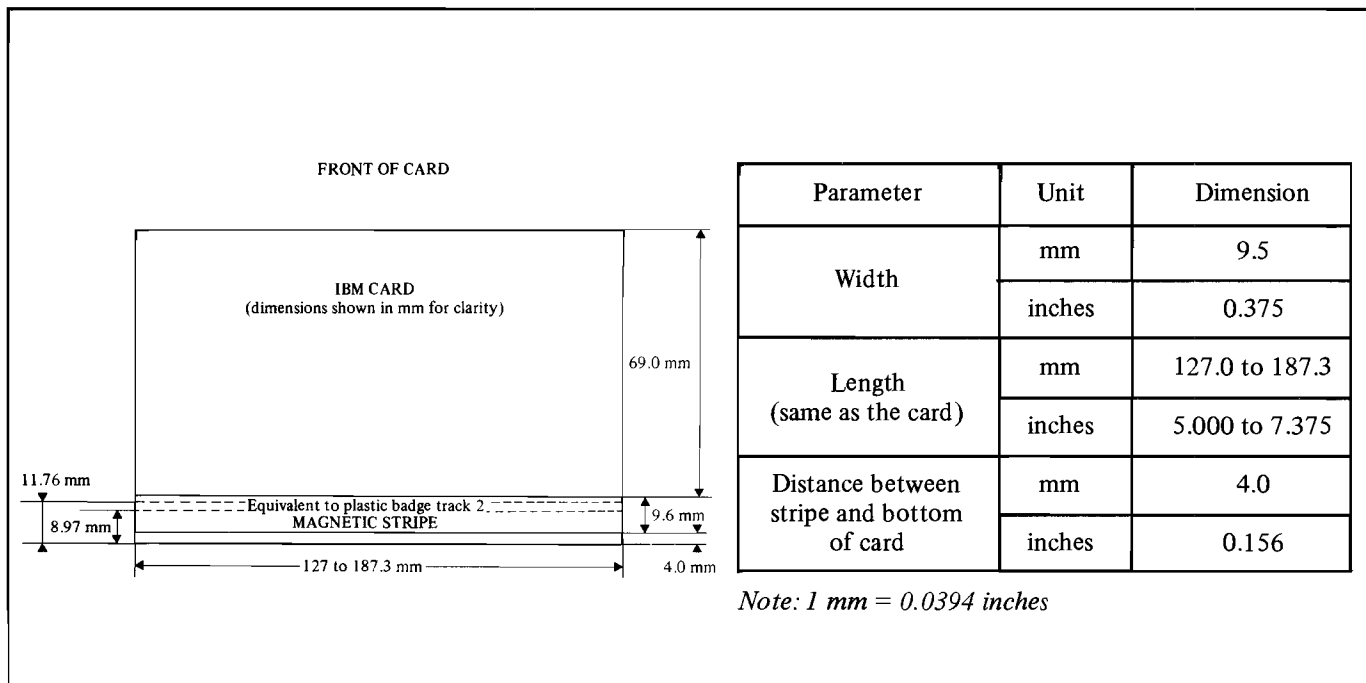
IBM 3630 Compatible Card Magnetic Stripe Dimensions
